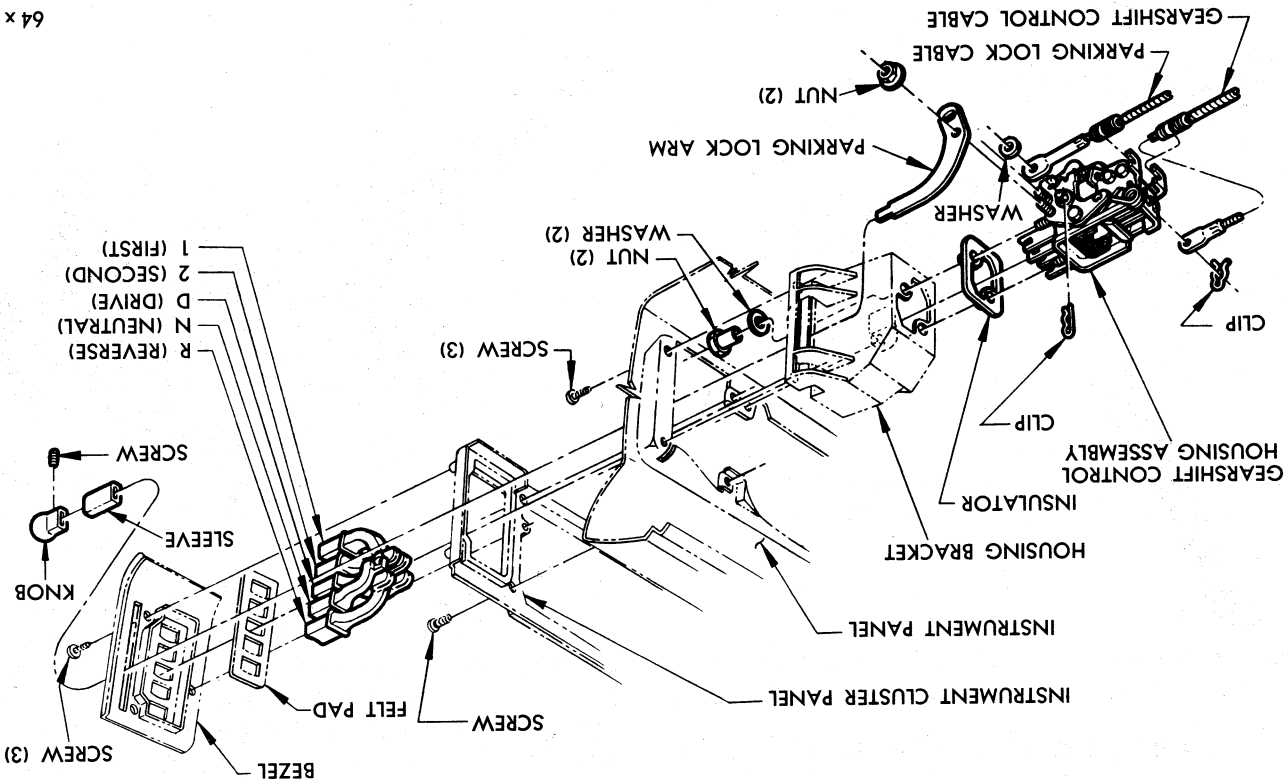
Removing or Installing Gearshift Control Unit (Plymouth)
